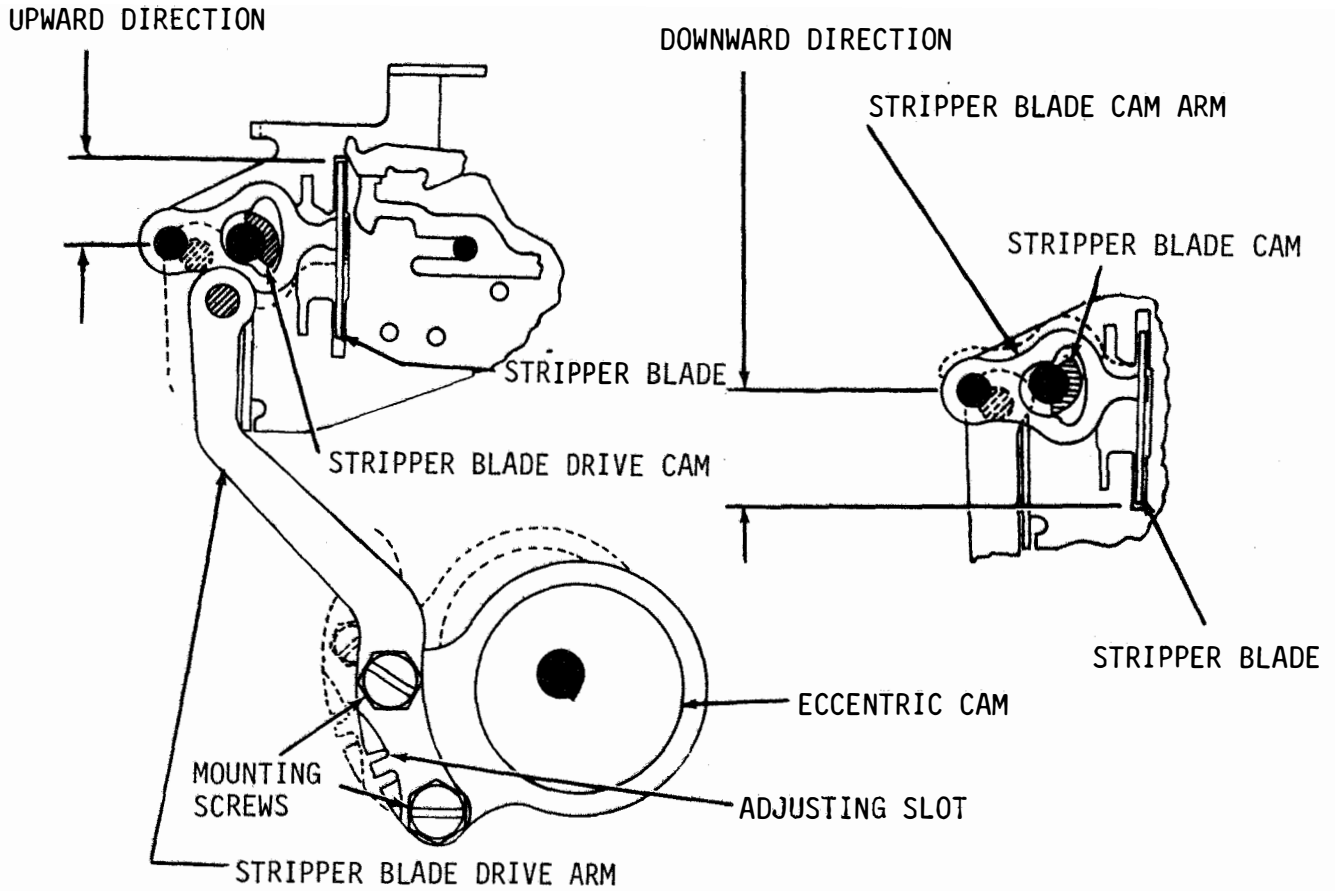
Stripper Blade Drive Cam Position, Rear View
